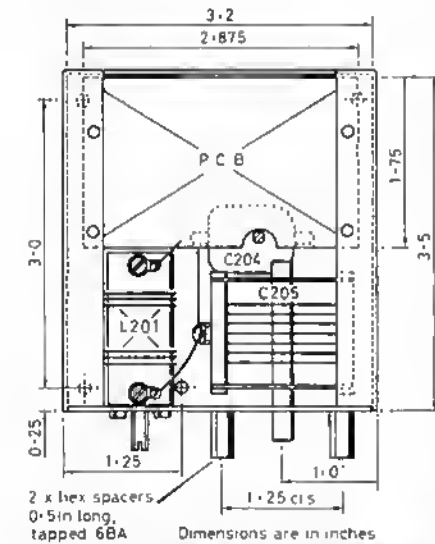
(A). LAYOUT OF COMPONENTS INSIDE THE PURPOSE-BUILT ALUMINIUM BOX FOR MODULE 2 - THE VFO.
